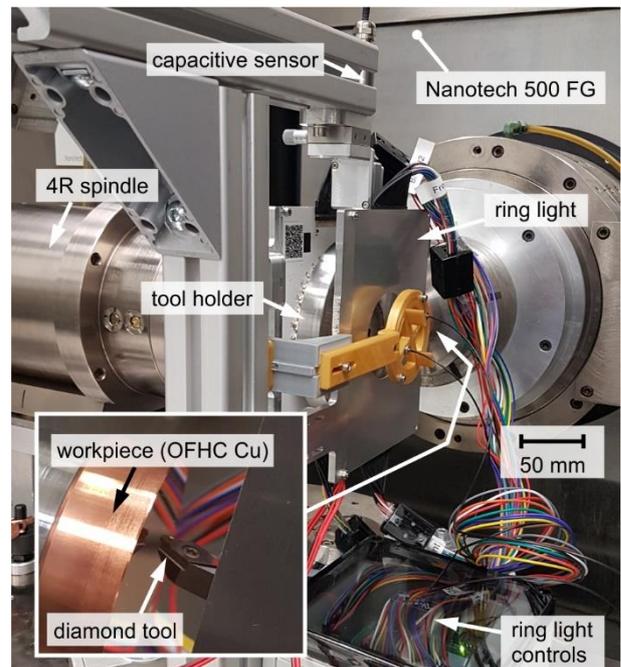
Setup for diamond milling with multiple cutting edges on a Nanotech 500FG machine tool
